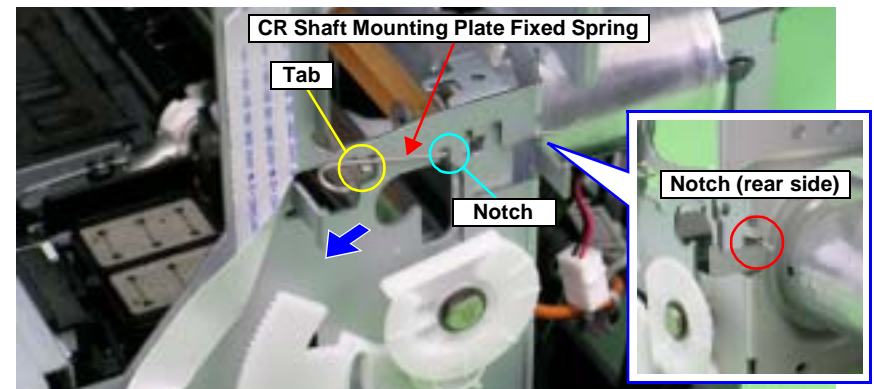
Removing CR Shaft Mounting Plate Fixed Spring
